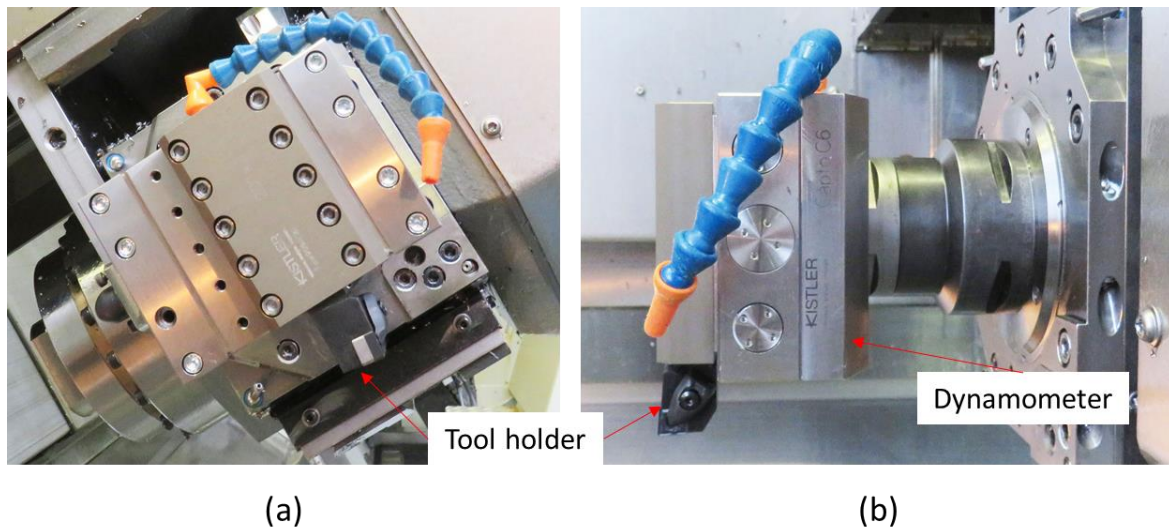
Photograph of Kistler Type 5070 dynamometer plate installed in the WFL M100 MillTurn machining centre with the tool holder and insert in place prior to the machining operation. (a) Front and (b) lateral view of the dynamometer and the tool holder.
